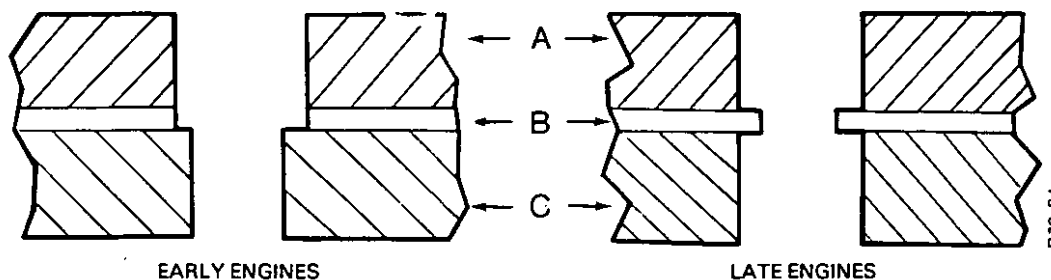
CYLINDER BLOCK AND CYLINDER HEAD GASKET
